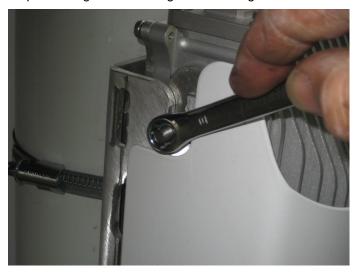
Tighten flange nuts (4 poitions) once the required mounting angle is set
